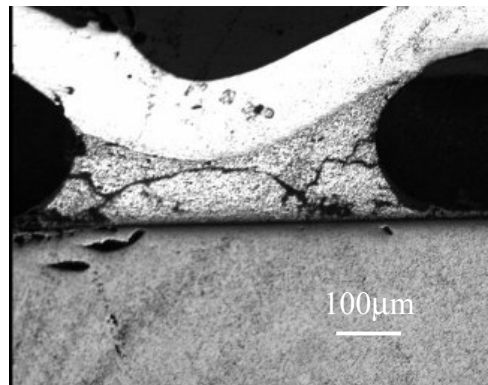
Cross-section of a typical dimple solder joint after 12,700 cycles (Sample #9).
